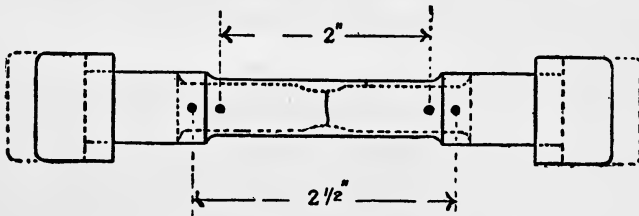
TEST PIECE. CIRCULAR SECTION.
